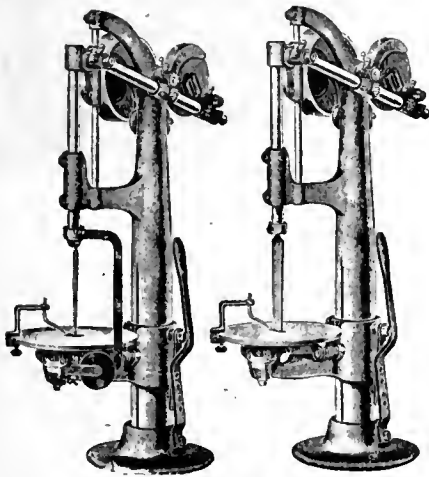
MACHINE ARRANGED AS HACKSAW AND FILER
